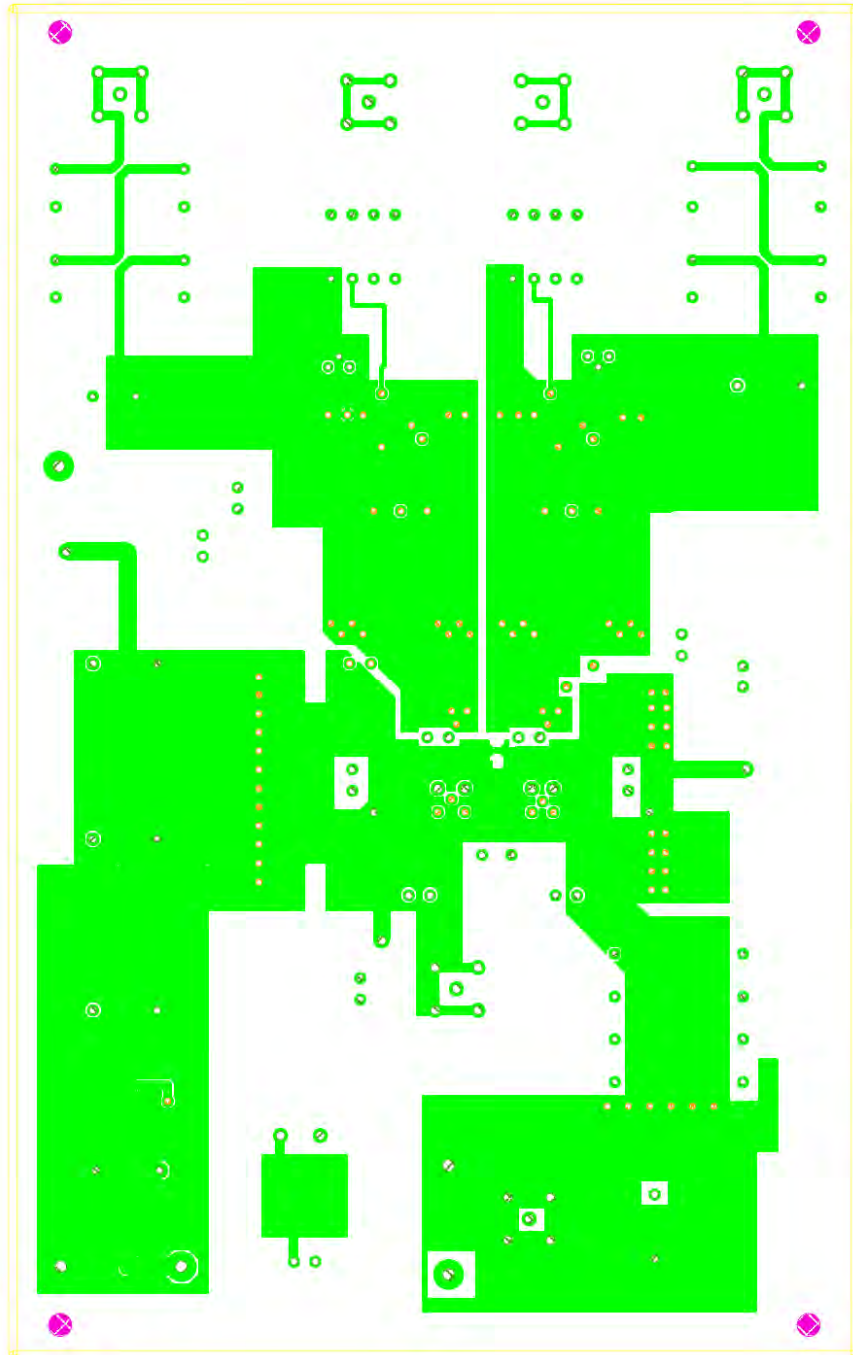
PCB design of inner layer corresponding to the test board of Figure G.1.1.
